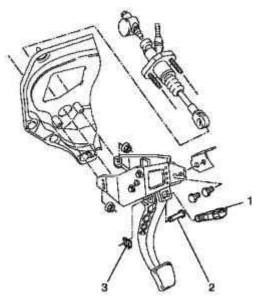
Removing the clutch pedal: 1 - traction control switch, 2 - attachment bolt pedal, 3 - spud
